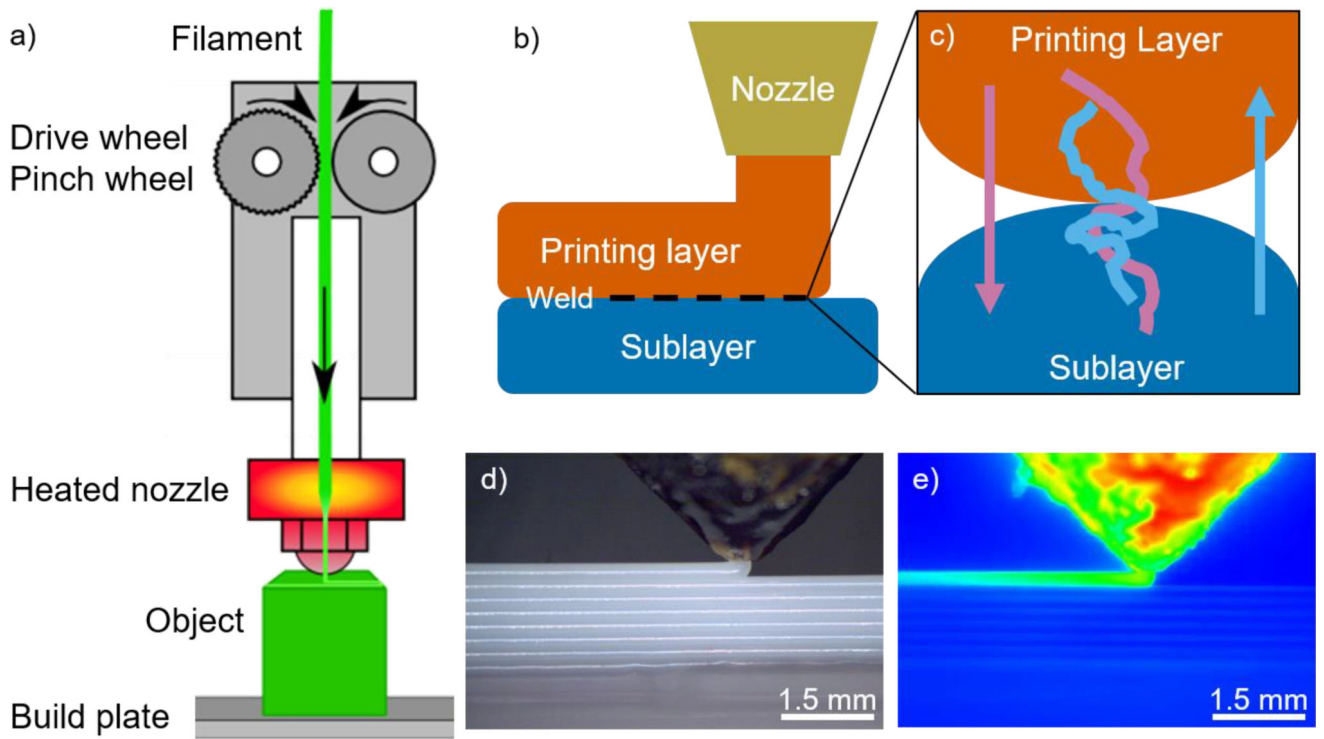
Image of material extrusion 3D printing process a) illustration of extrusion components, b) illustration of process and weld location, c) illustration of weld formation and chain diffusion d) visible light image of printing process with 8 layers, and e) false color infrared image of printing process with 8 layers.
